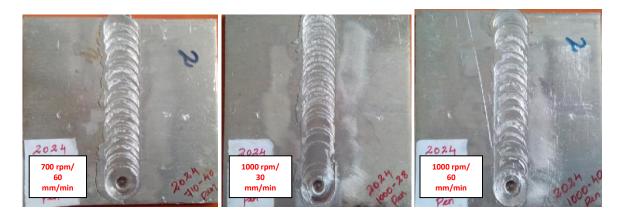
Fabricated welded specimen by pentagonal tool pin profile
